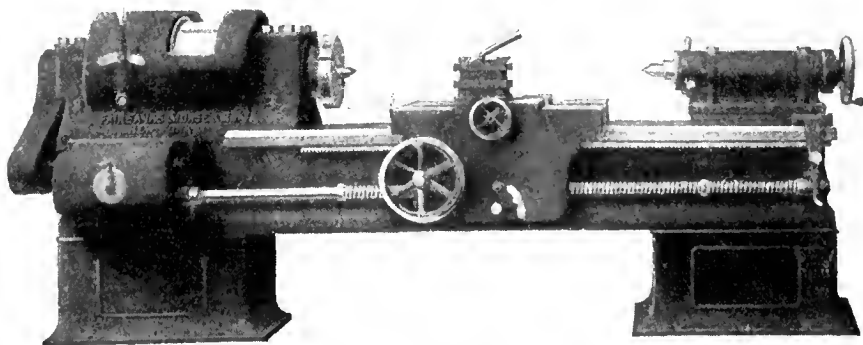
HEAVY DUTY 20-IN. DOUBLE BACK-GEARED MANUFACTURING LATHE FOR SHELLS UP TO 12 IN. DIA.
